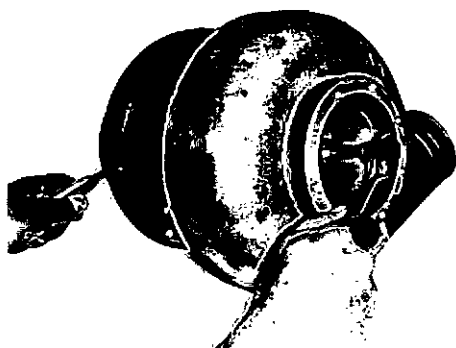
, (VTST26). Removing rotor nut from rotor shaft
